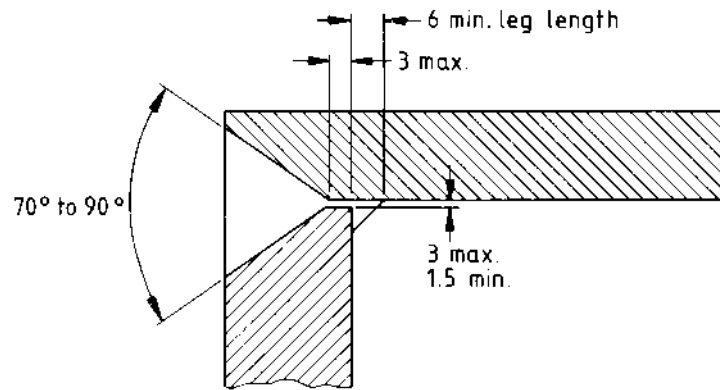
Attachment of unflanged flat end plates or tube plates to shell
